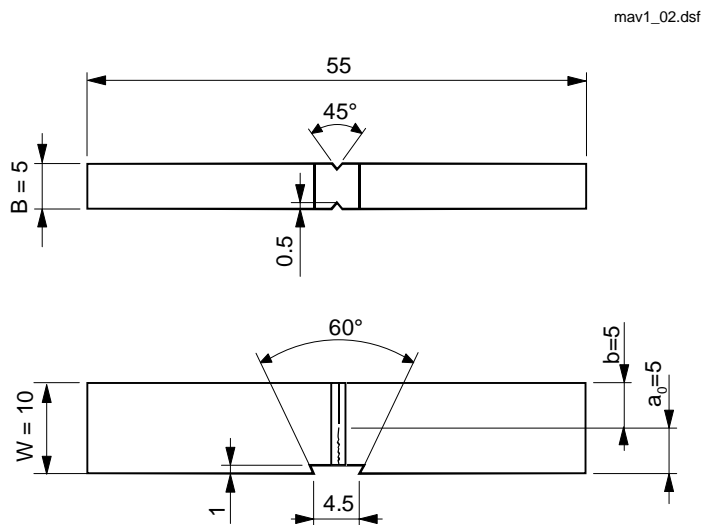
The nominal dimensions of the 3PB specimens. Integral clip seats were used only in the VTT tested specimens. Specimens, which were machined from broken halves of Charpy-V specimens, had  $B = 4.85$  mm
